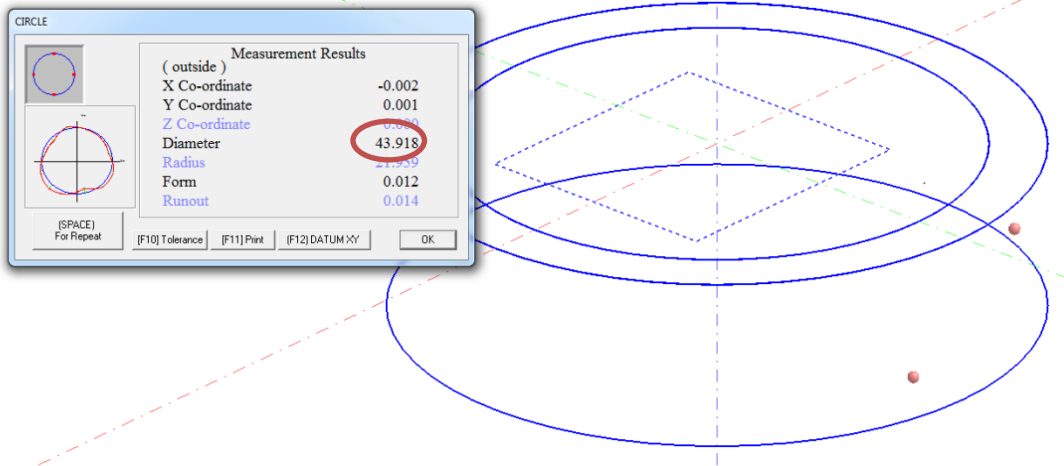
CMM Results of Right-hand Side Seal Groove of the Piston
